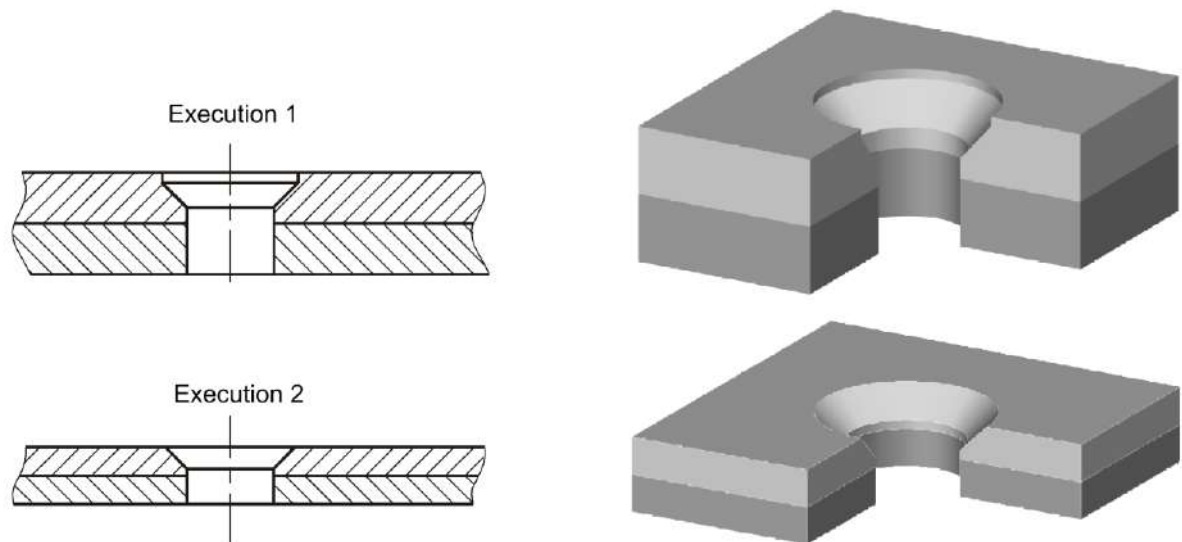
Holes for riveting by OCT 1 34055-92
